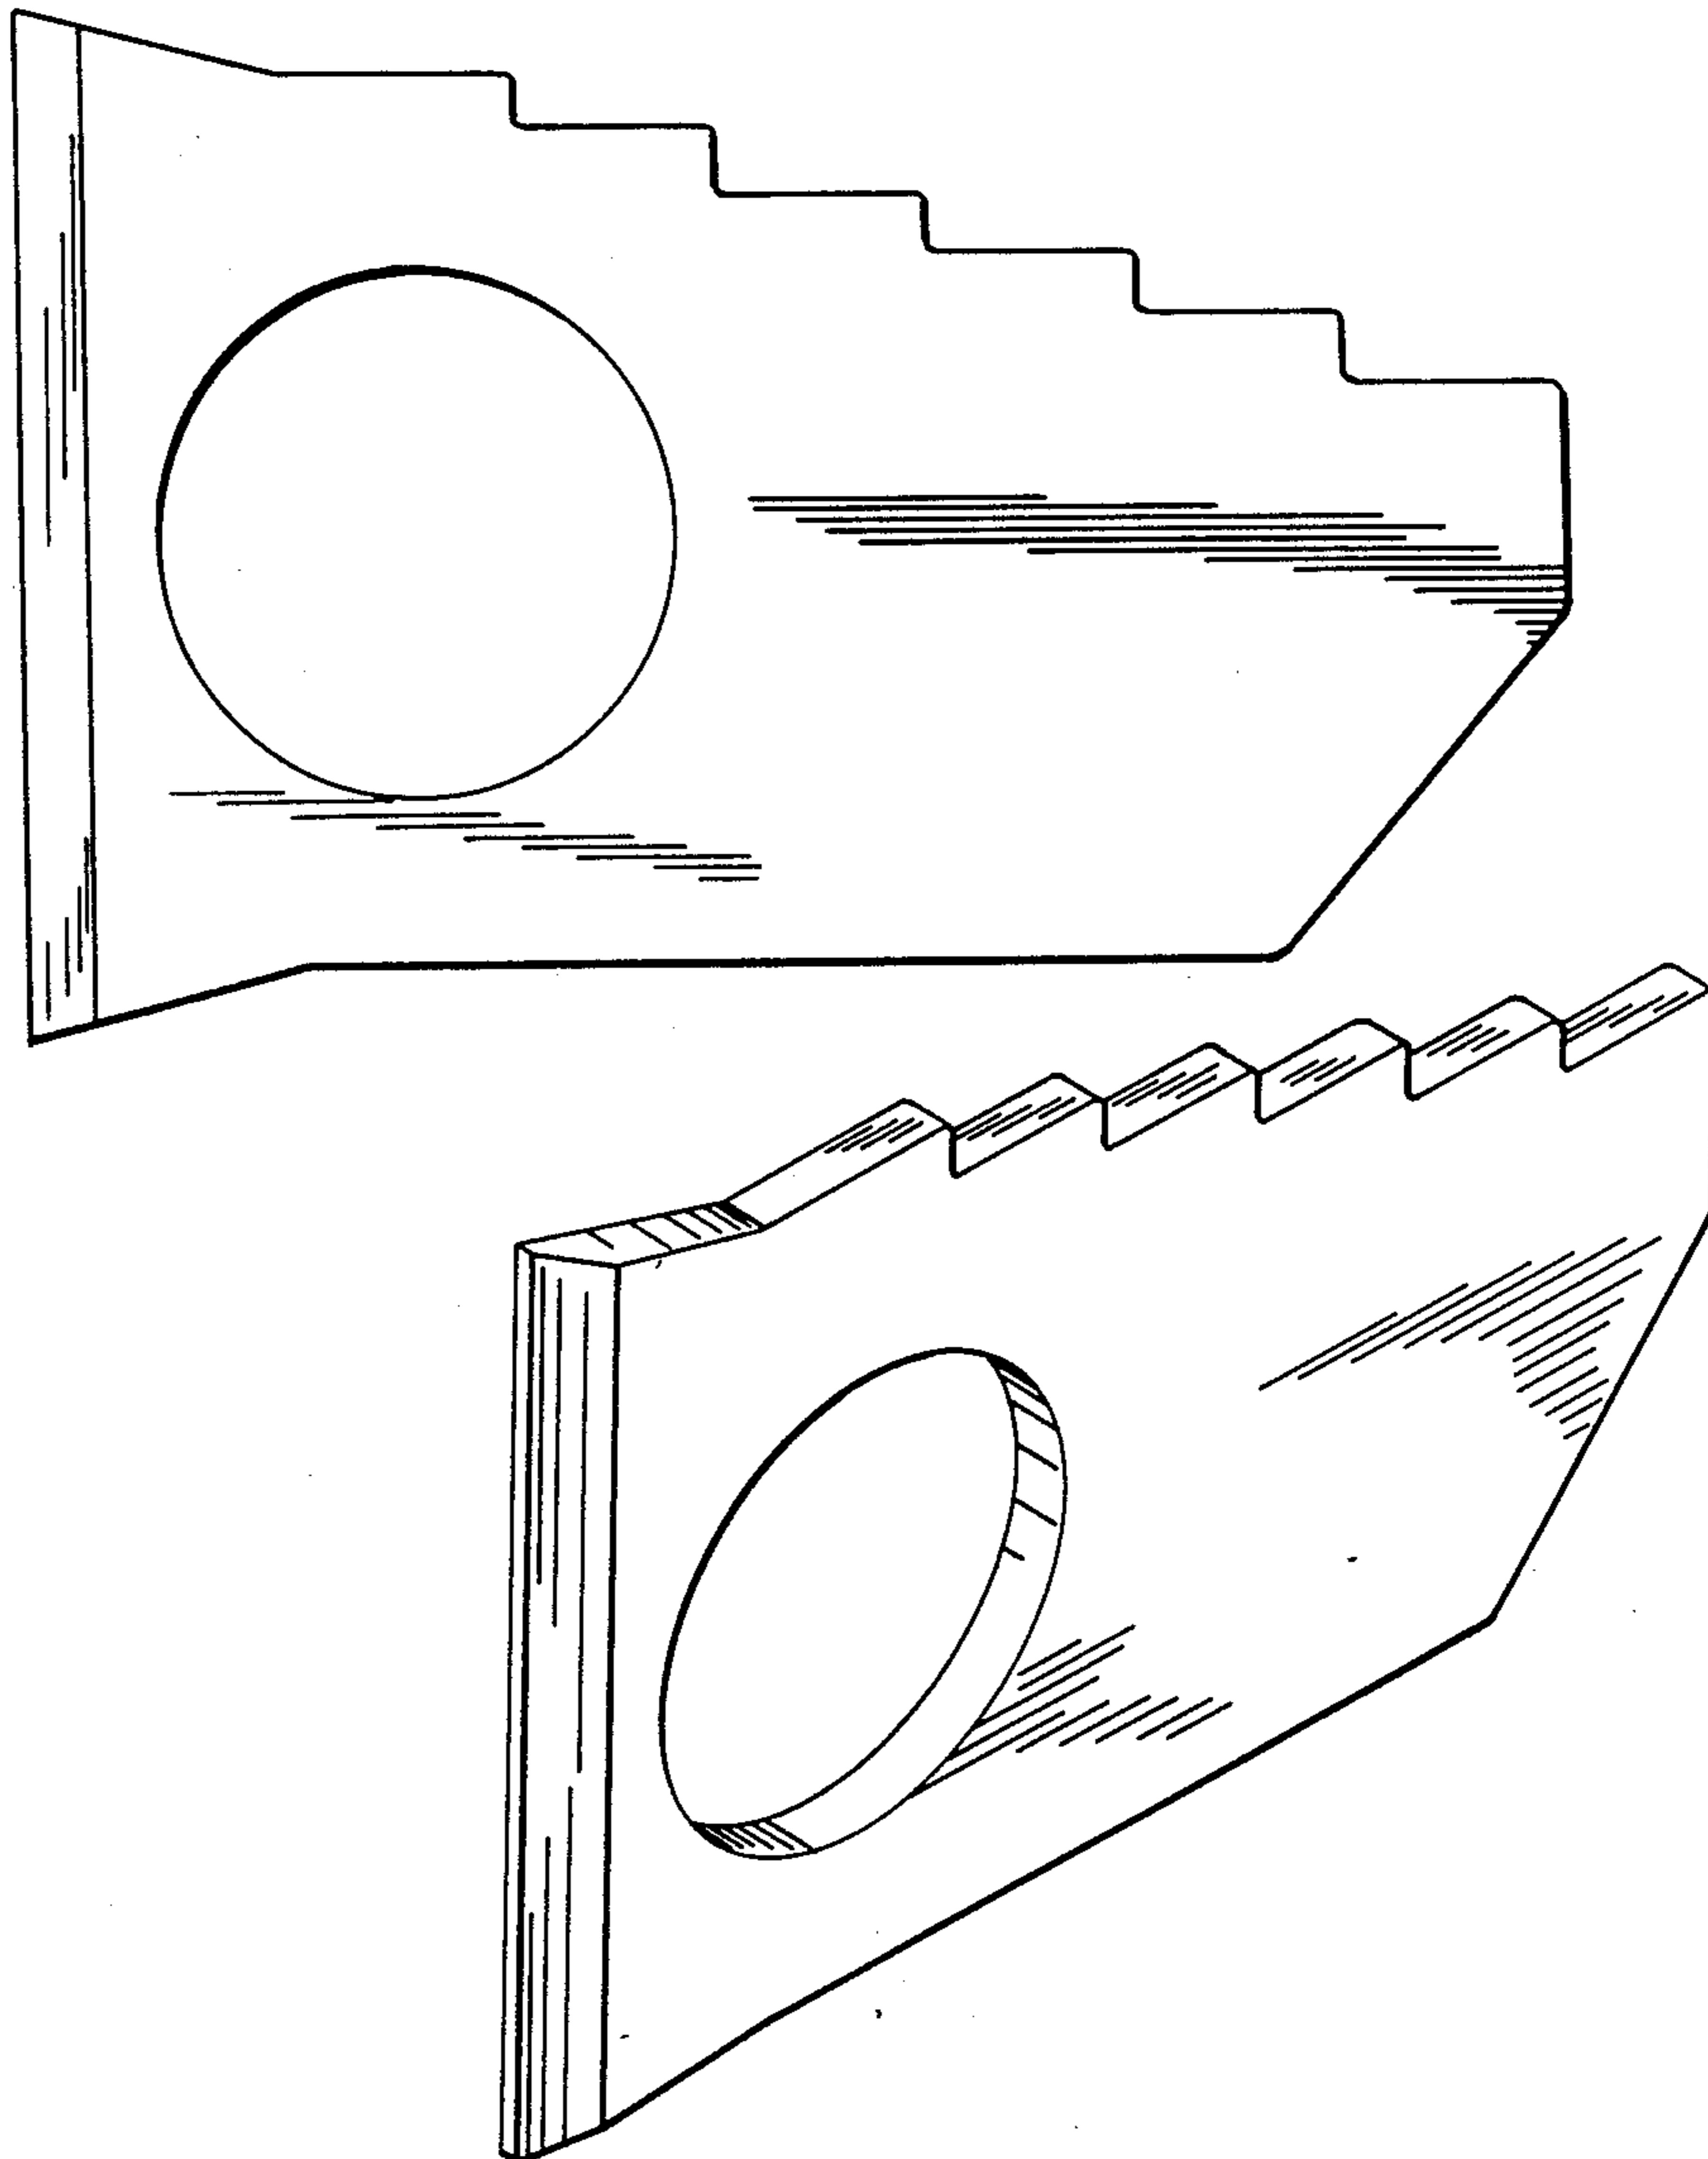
is a front elevational view of an integrant gasoline pump nozzle trigger holder and ice scraper showing my new design;
